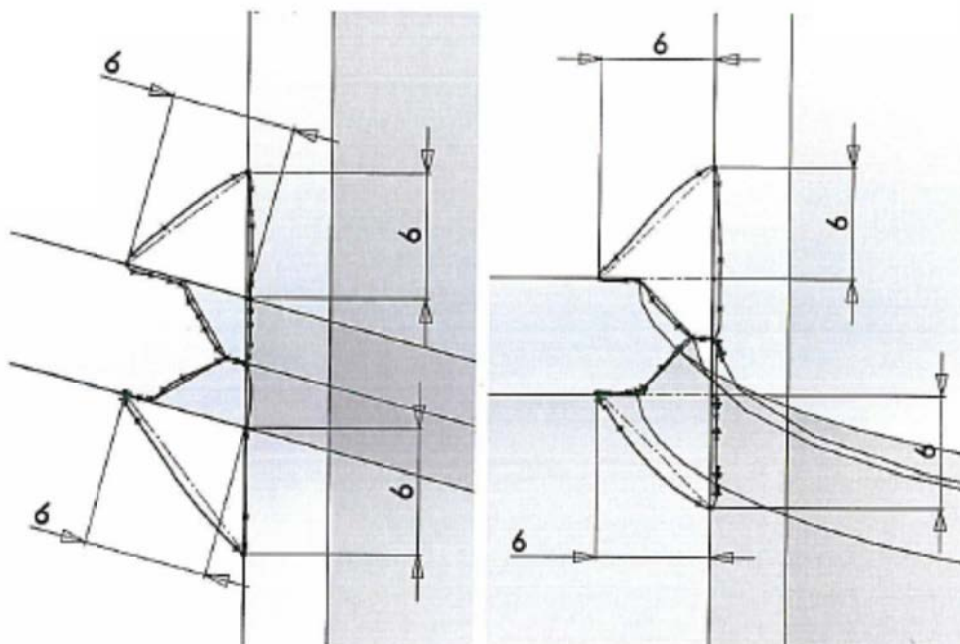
Equal 6mm fillet welds superimposed on complete penetration bevel welds.
